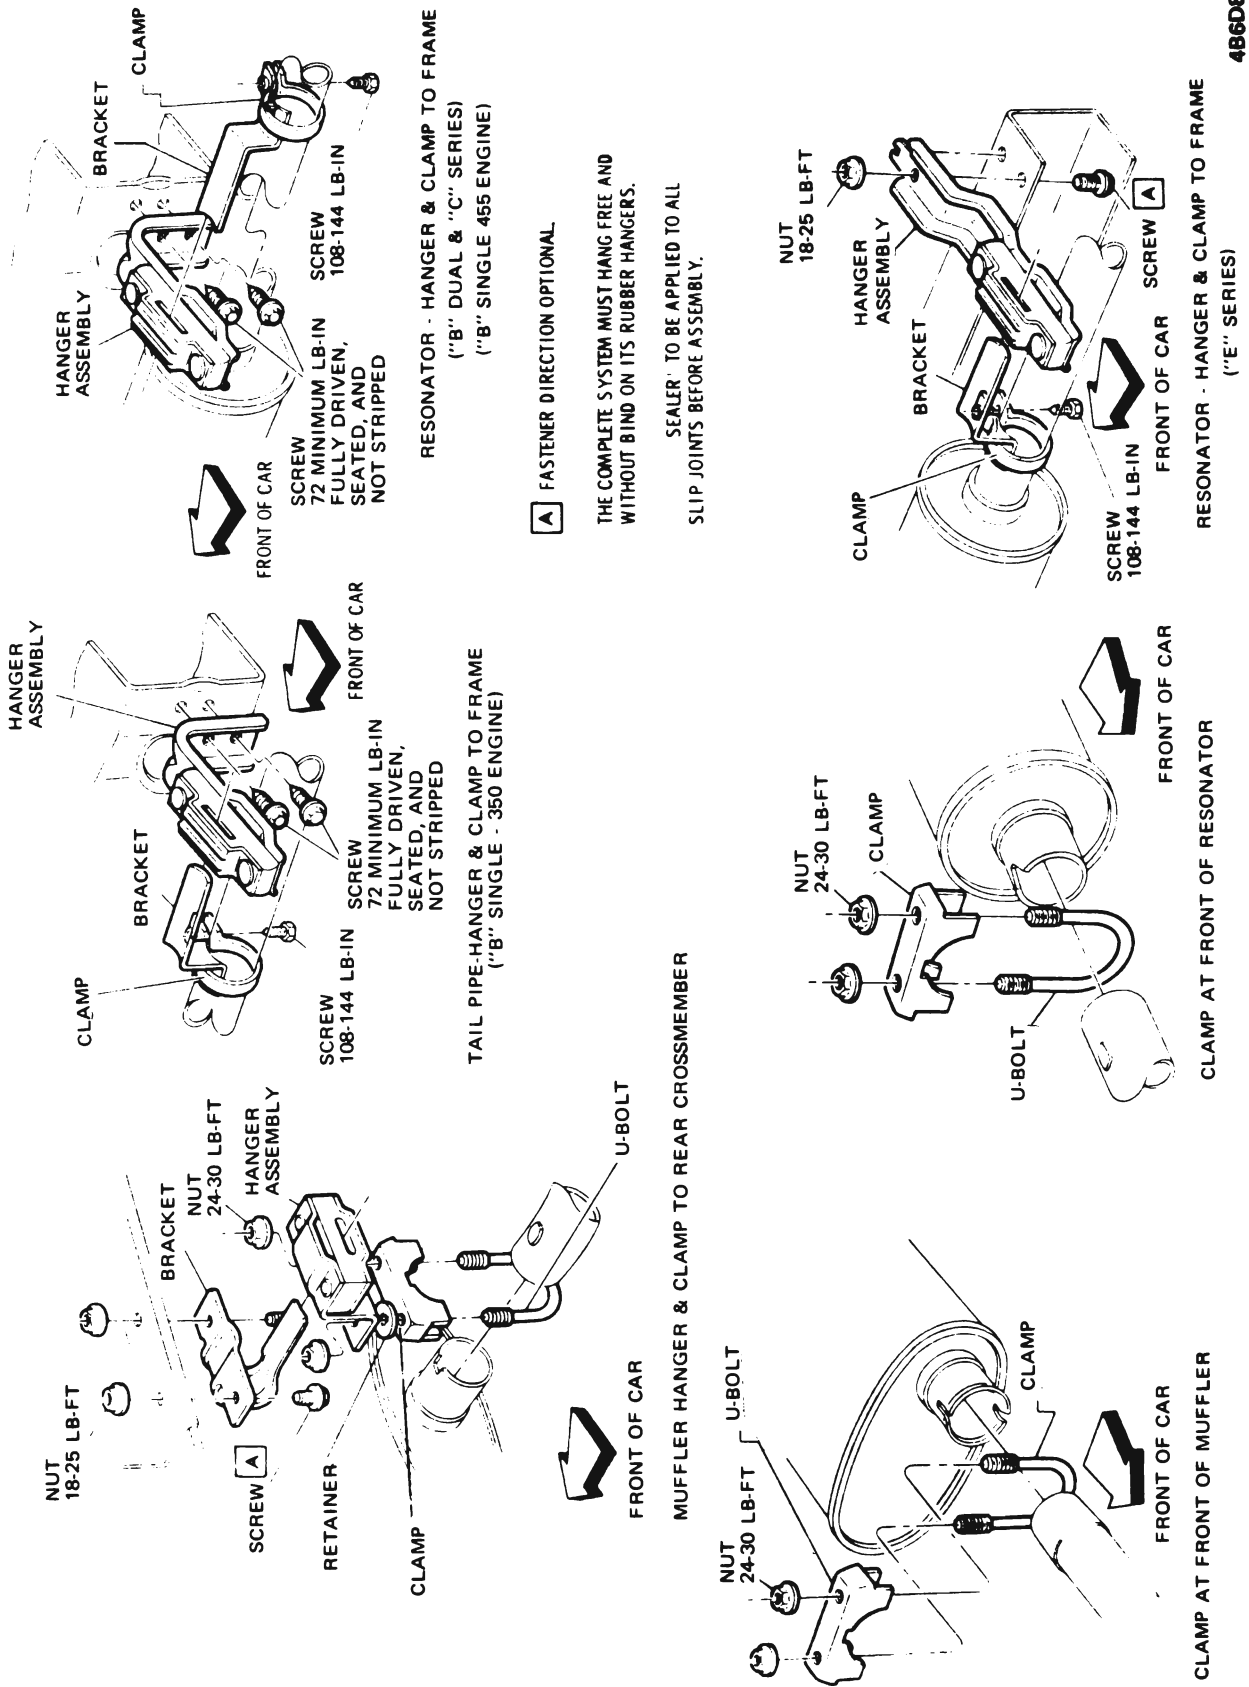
D-8 B-C-E Series Exhaust System Attaching Parts (Sedans and Coupes)
